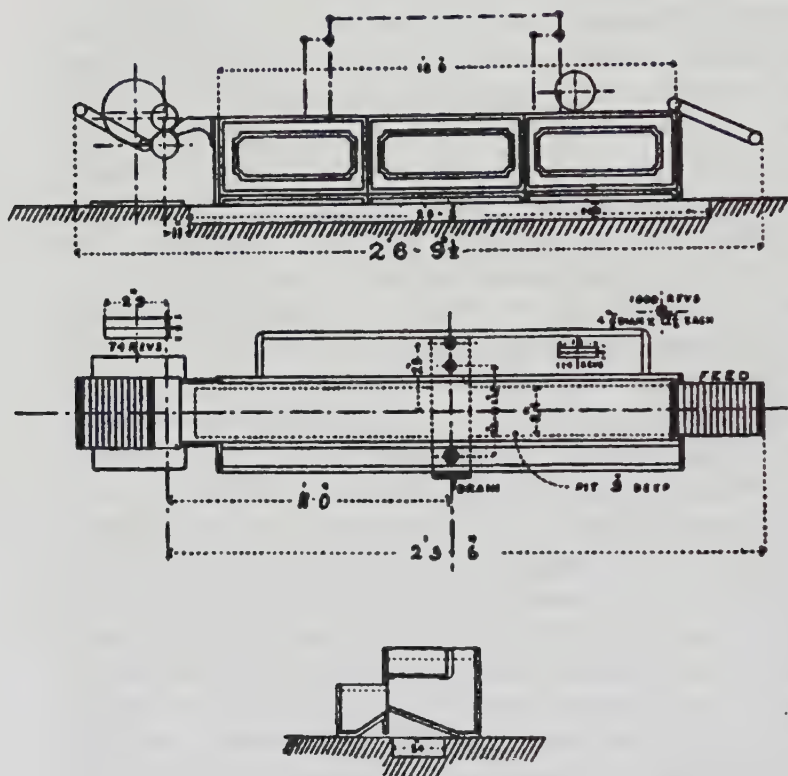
Plan, Elevation and Section of McNought's Washing Machine
